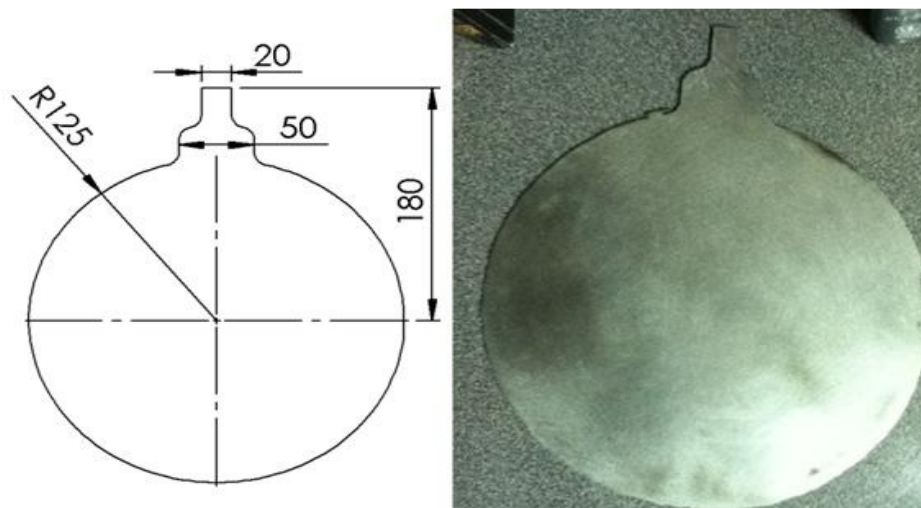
Design sketch and specimen sample part (dimensions are in millimeters)
